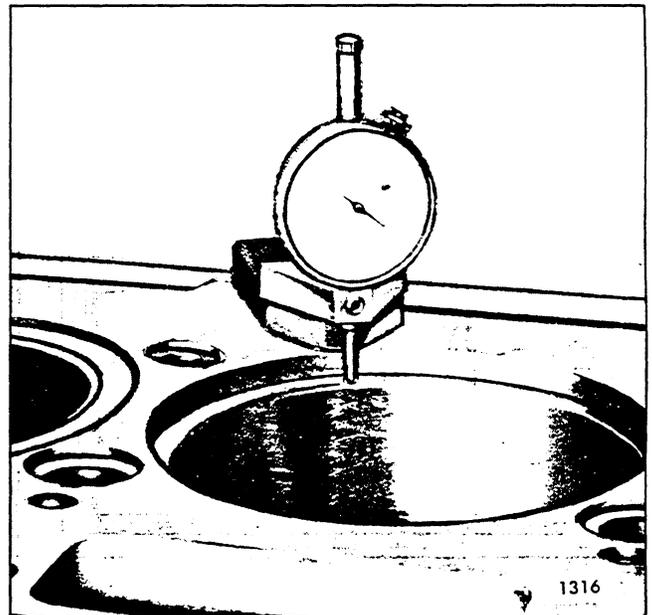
Checking Depth of Counterbore for Cylinder Liner with Tool J 22273
